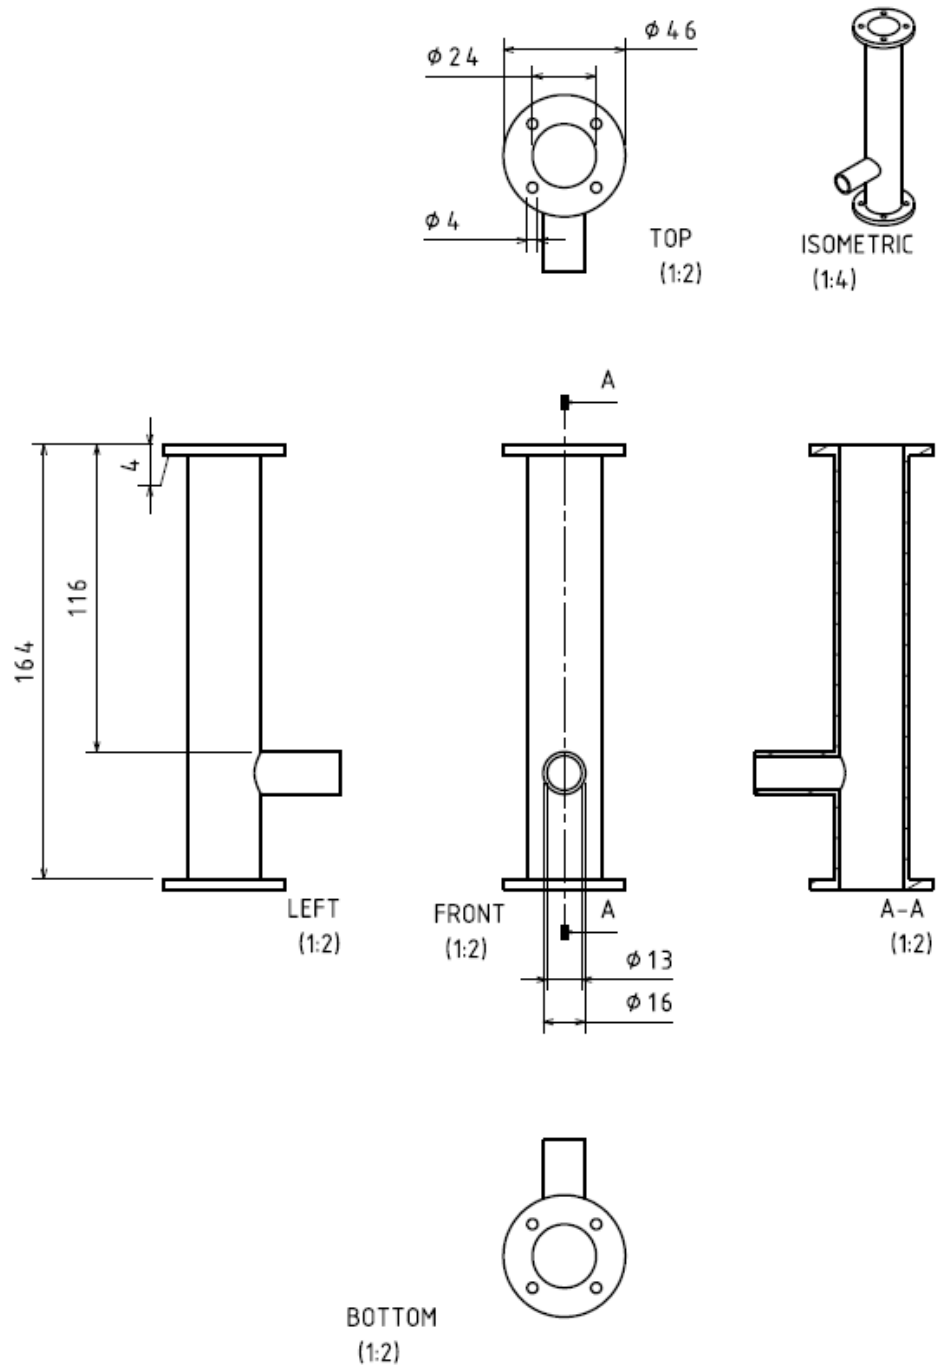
Drawing of plenum housing swirler. The horizontal section shows main air inlet.
